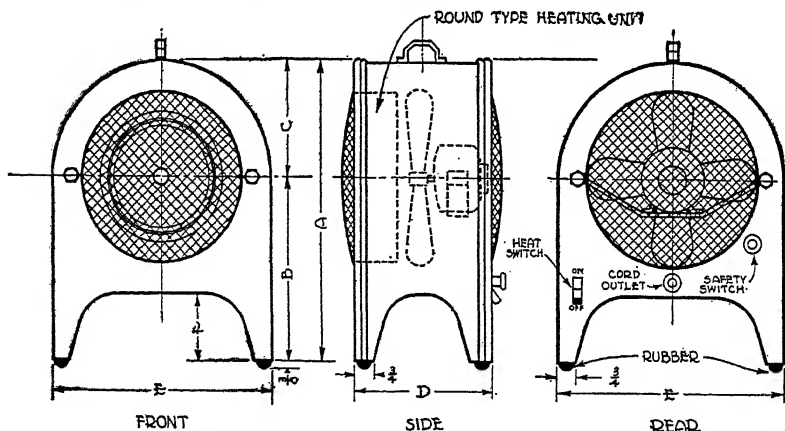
Working Drawings Showing Construction of a Fan Type Portable Electric Heater
